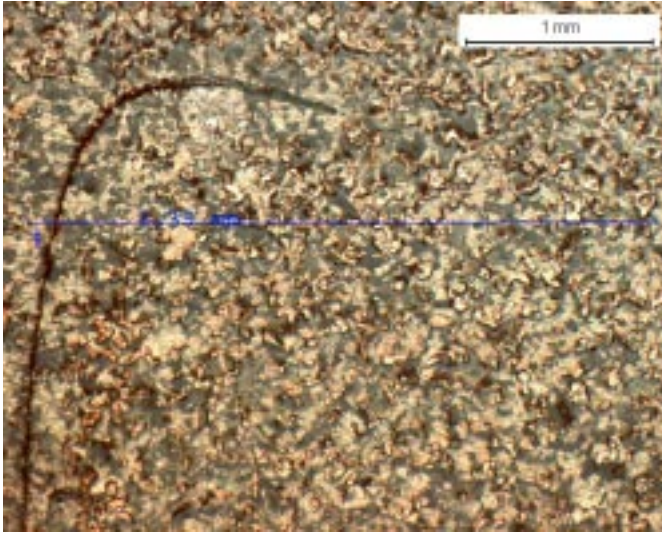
Cross section of a JLH (Joint Line Hooking).
